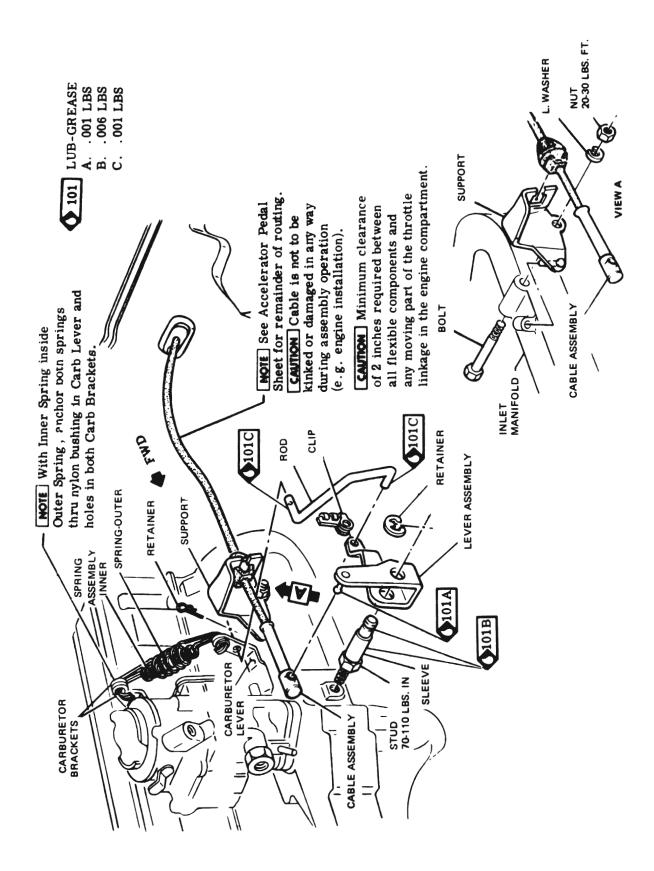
E-17 Accelerator Controls Engine Compartment 250 Cu. In. Engine
